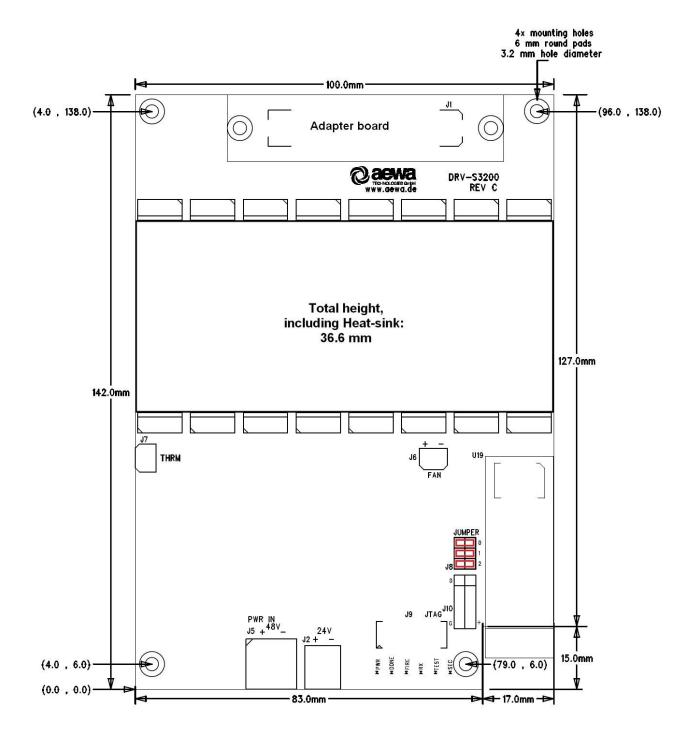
DRV-S3200 MECHANICAL DIMENSIONS
